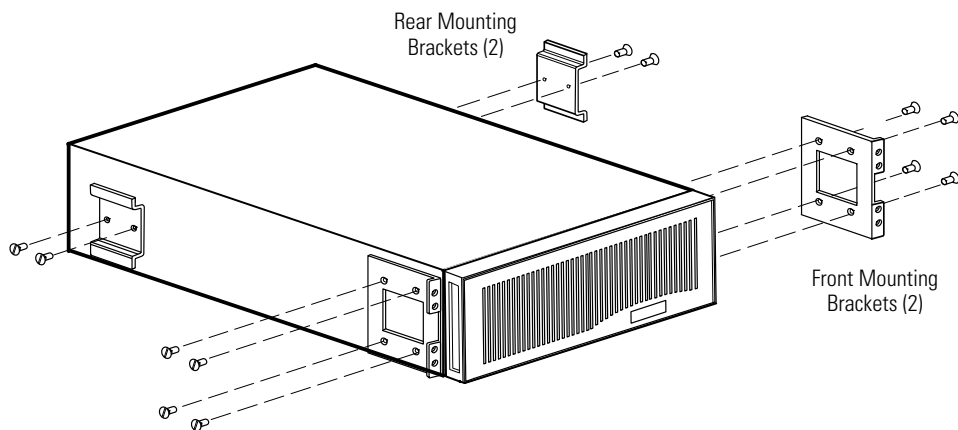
Installing the EBM Front and Rear Mounting Brackets
